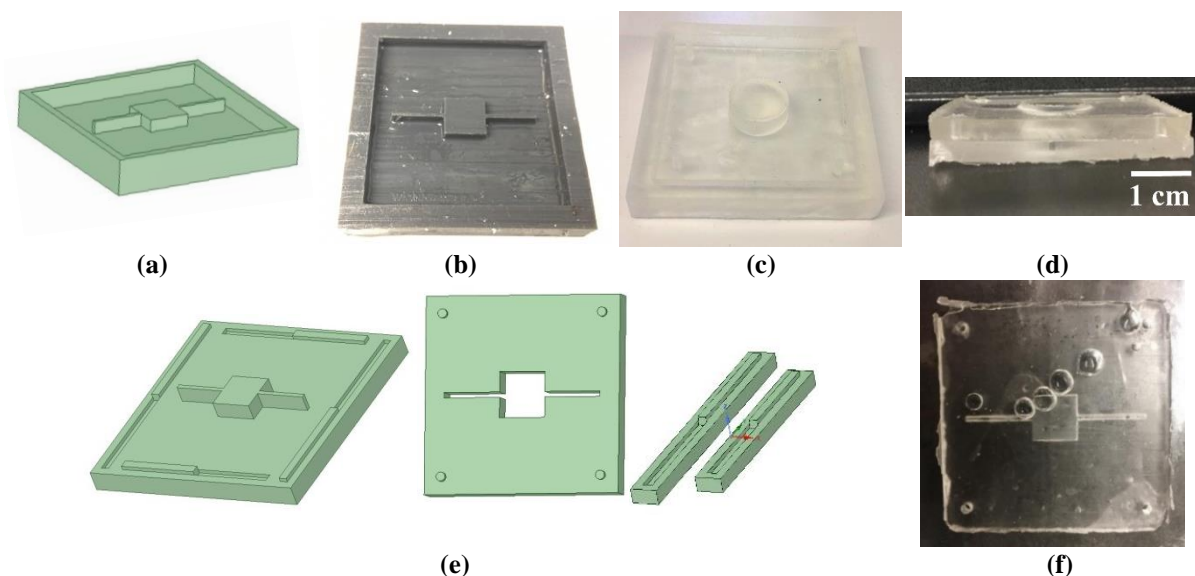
The 3D printed mold for PDMS layers fabrication (a) blueprint model, the mold printed with (b) FDM, (c) SLA and (d) the resulting PDMS layer of the latter one. (e) The design of the complex combinable mold and (f) the resulting PDMS layer.
